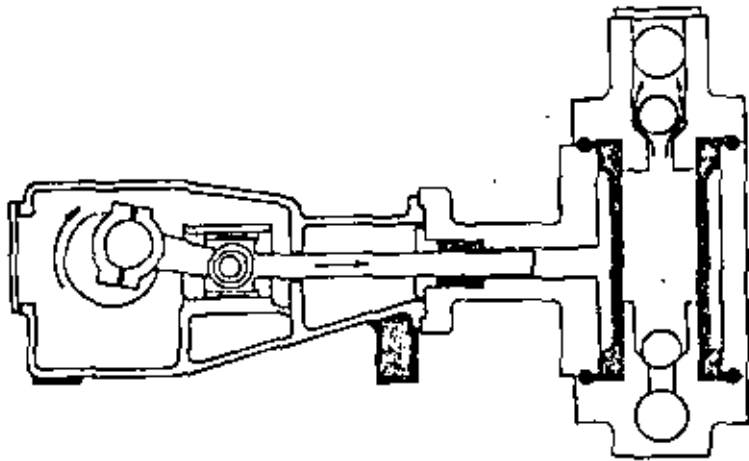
HORIZONTAL SINGLE-ACTING CYLINDRICAL DIAPHRAGM PUMP
